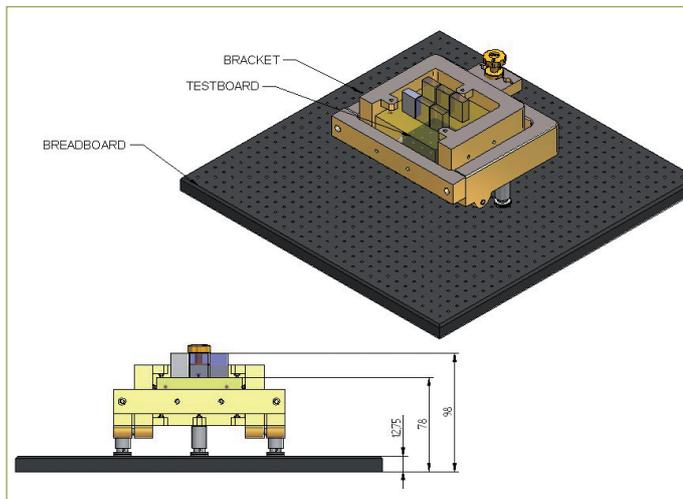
ISOMETRIC AND FRONT VIEW OF THE BRACKET WITH THE ASSEMBLED TESTBOARD.
